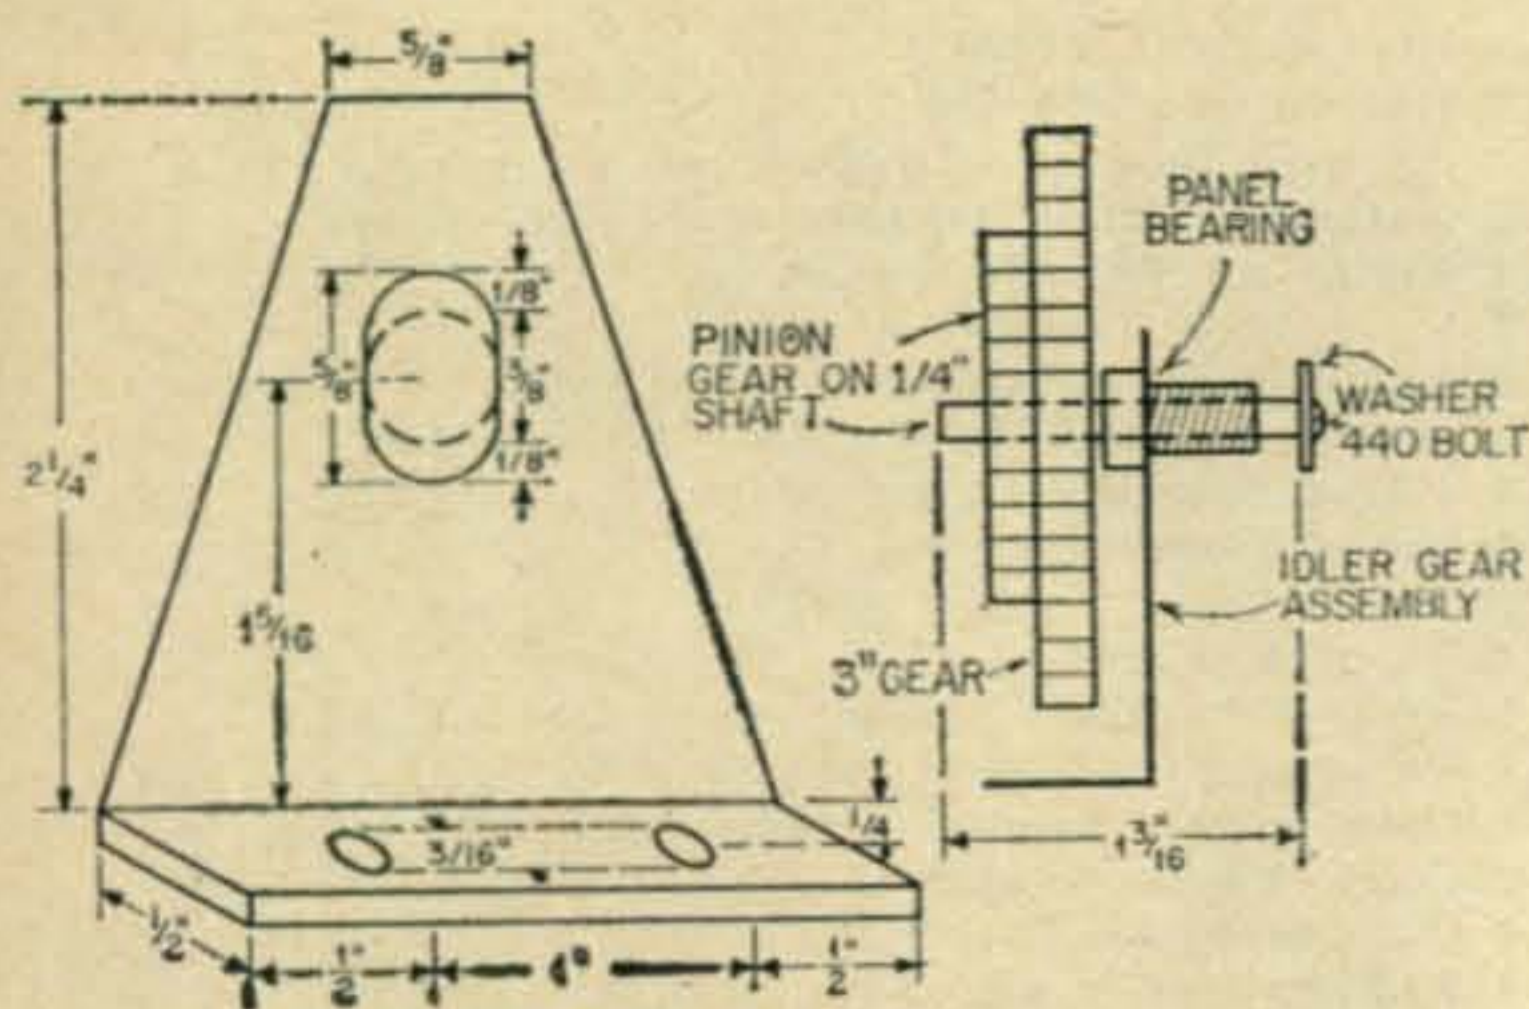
Idler gear assembly and mounting bracket. The gears used are Y4896 and Y48144 made by the Boston Gear Co.
